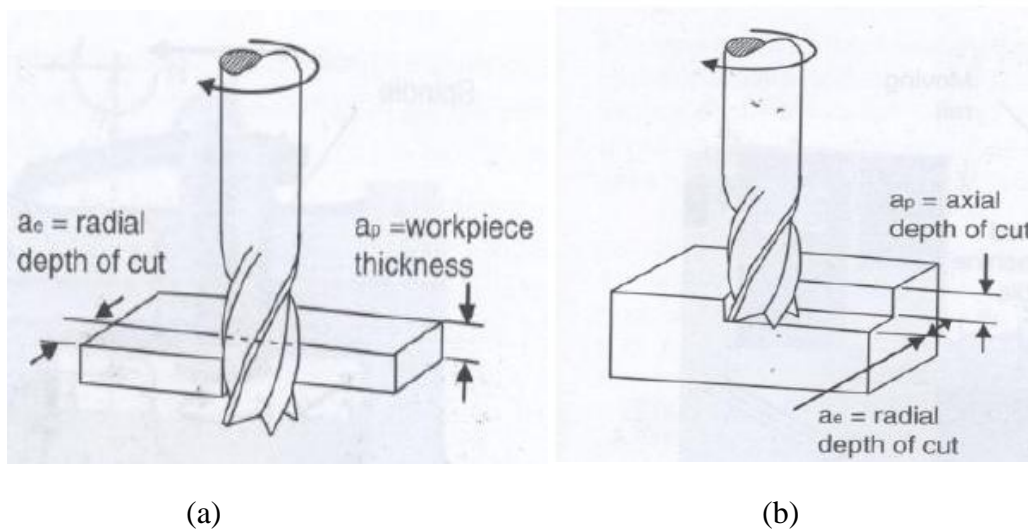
Types of Milling, (a) Edge trimming , (b) End milling
